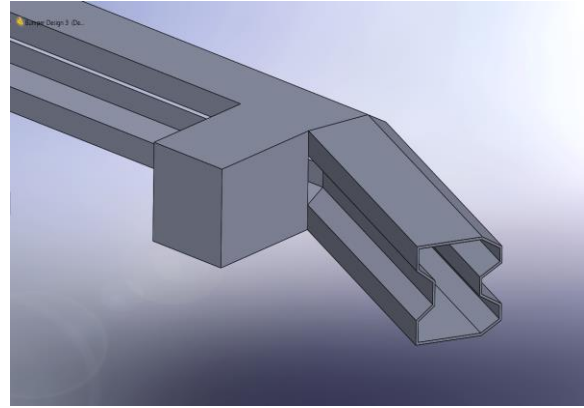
(e) Side view of the Rolled Form Sectioned Bumper Beam
